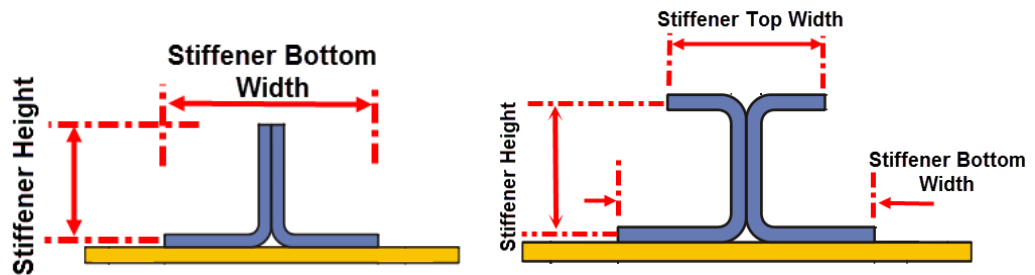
Geometrical parameters for blade stiffener (left) and T-type stiffener (right)
